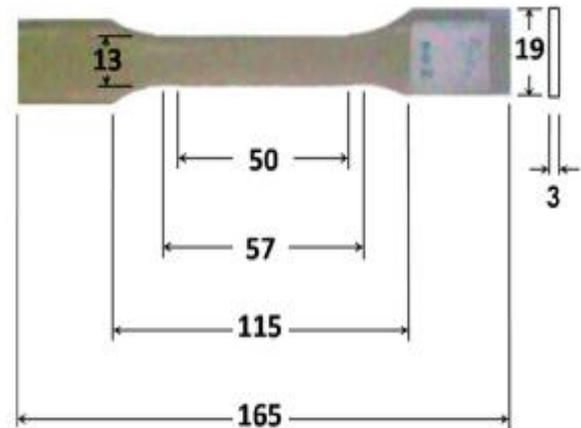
Polyester Tensile Test Specimen, (Dimensions are in mm). [9].
